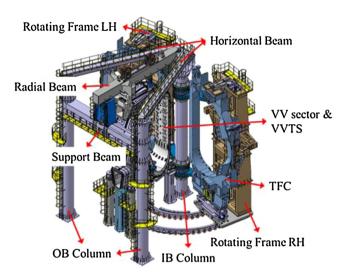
Configuration of the Sector Sub-assembly Tool.
